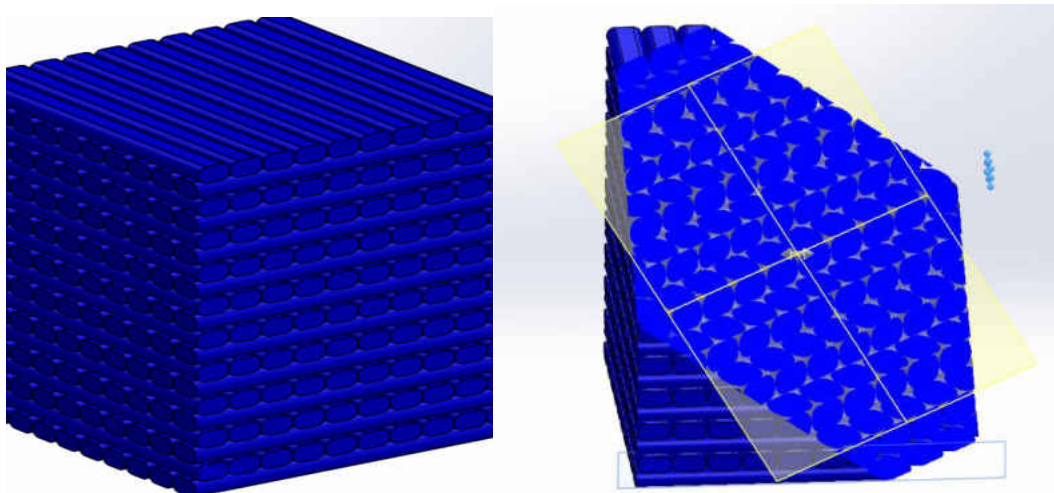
Solidworks material cube whole (left) and sectioned using section tool (right)
